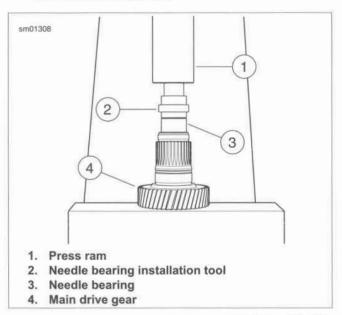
Pressing Outer Needle Bearing Assembly into Main Drive Gear
